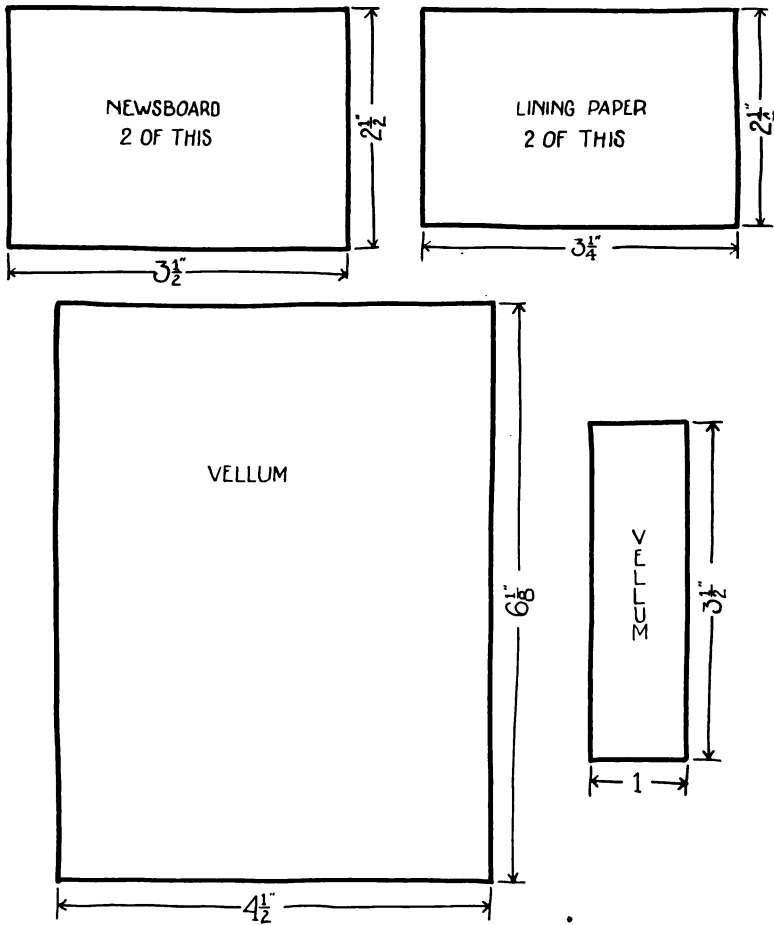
PLATE XIX. Freehand sketches of the parts of a simple calendar mount.
